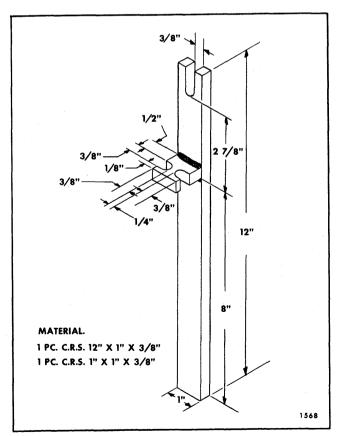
Rear Compartment Torque Rod Adjusting Tool
